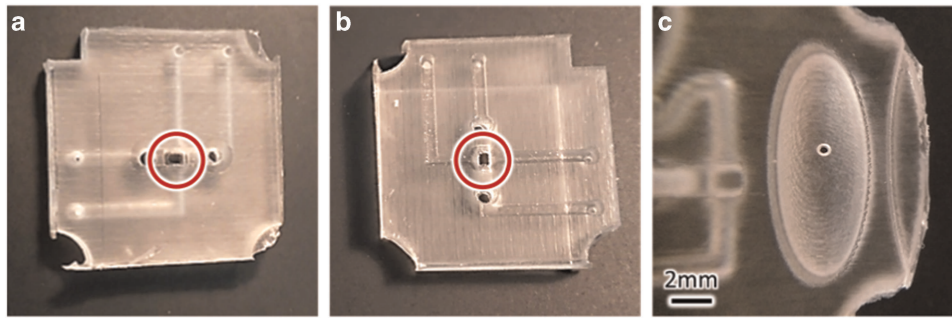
Illustration of membrane damage due to molding problems; points of damage have been circled. “Quake” valve device with ruptured and completely non-formed membrane: (a) Top view and (b) Bottom view. (c) Elliptical membrane punctured by a bubble-generated 400 µm pinhole.
